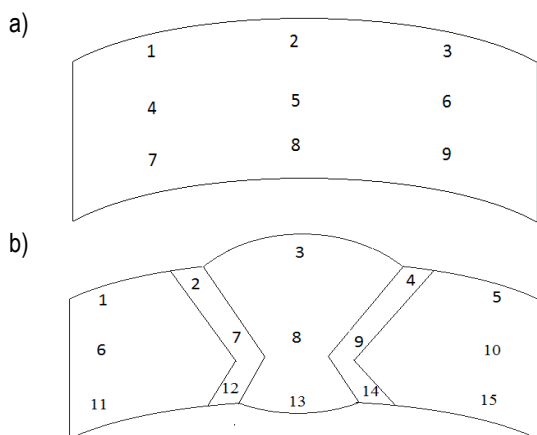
Drawings of samples for hardness measurement; a. seamless, b. with weld
